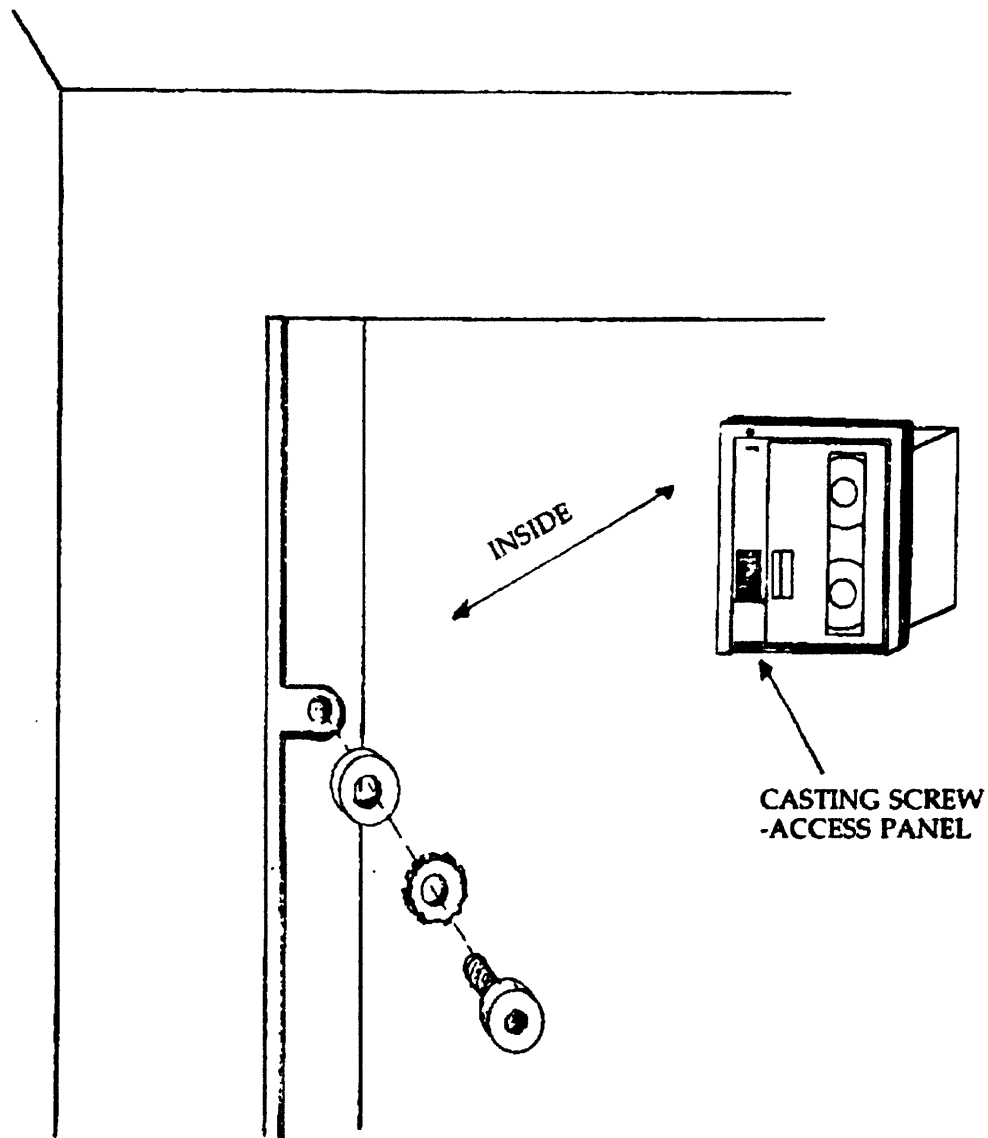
2-6 Option 132 Installation- Access, Left Chassis Mounting
